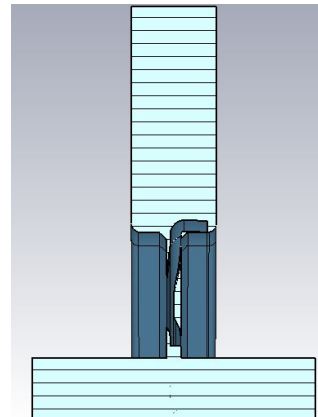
RF gasket mounted on a flange for vacuum tests.
